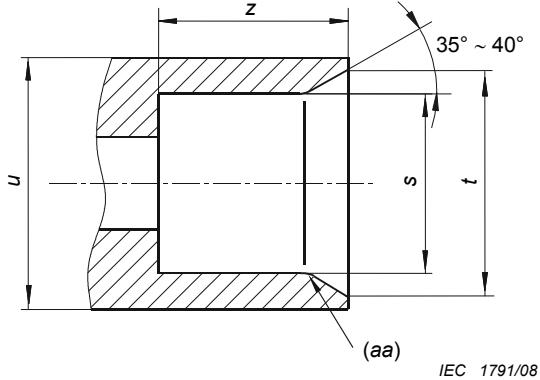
Gauge for outer contact of pin connector (for dimensions, see Table 3)
